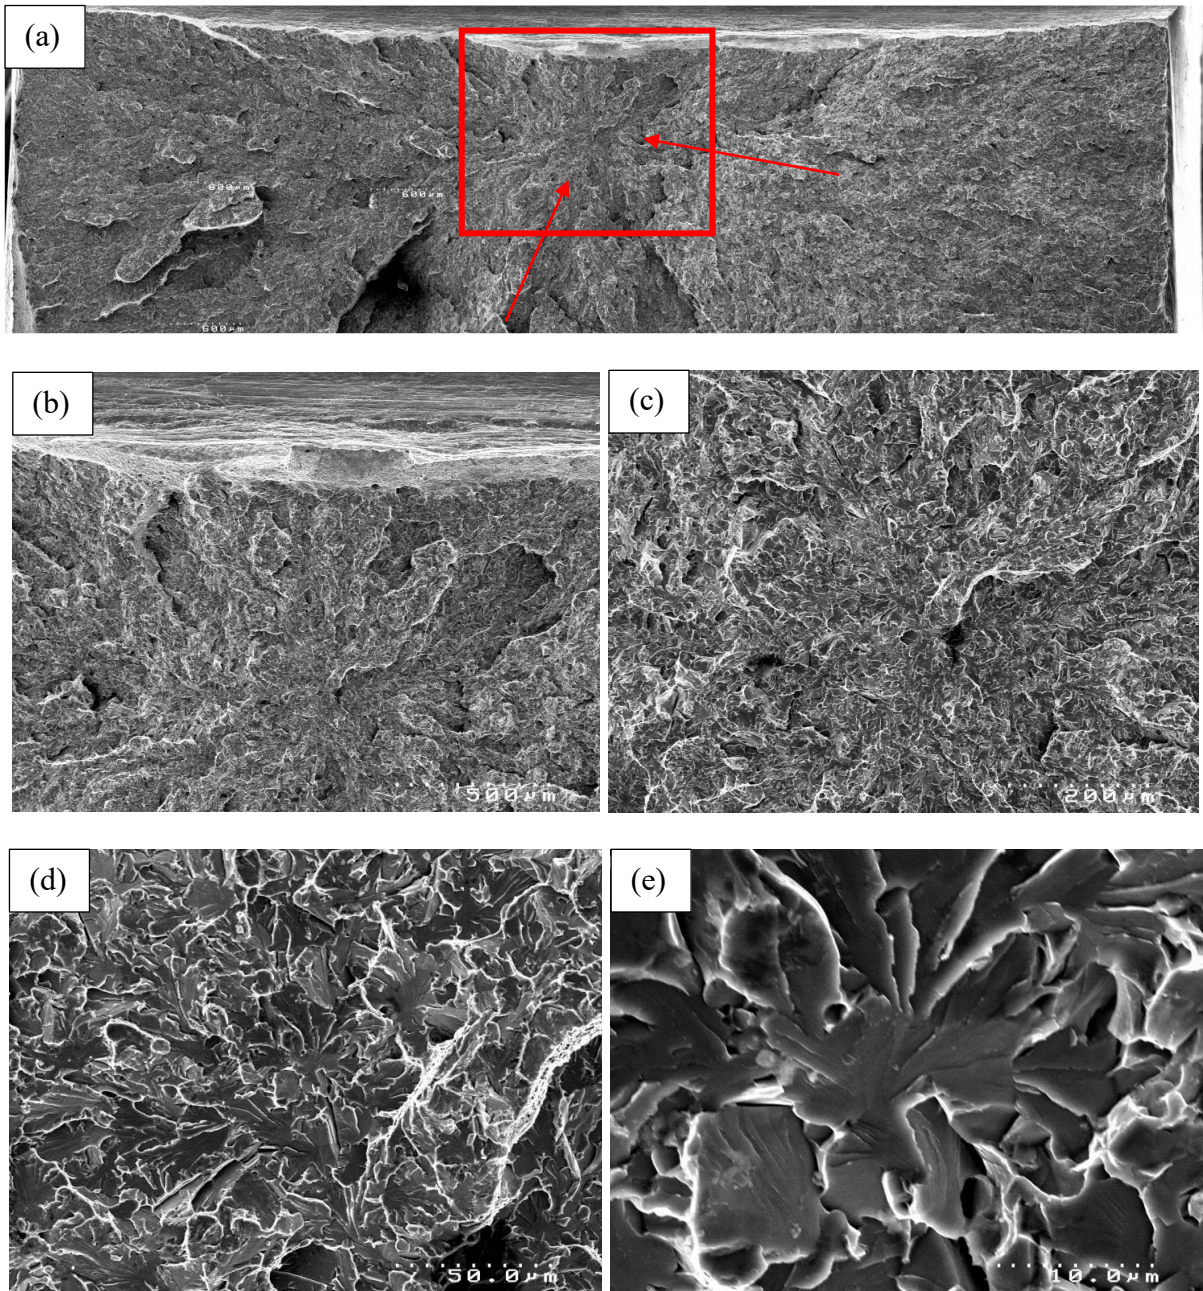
Fractography of Charpy specimen HT1-10 tested at  $-100^{\circ}\text{C}$ . (a) is the full view across the fracture surface; (b) (c) (d) (e) show the possible initiation site in magnification sequence.
